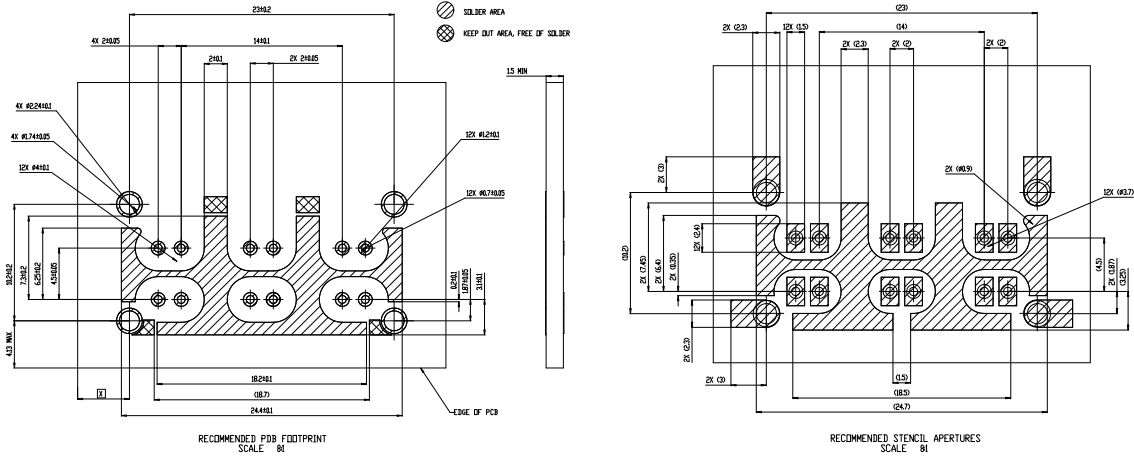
/ Pin Header 6P 90° unsealed, TE-No. 2397129
